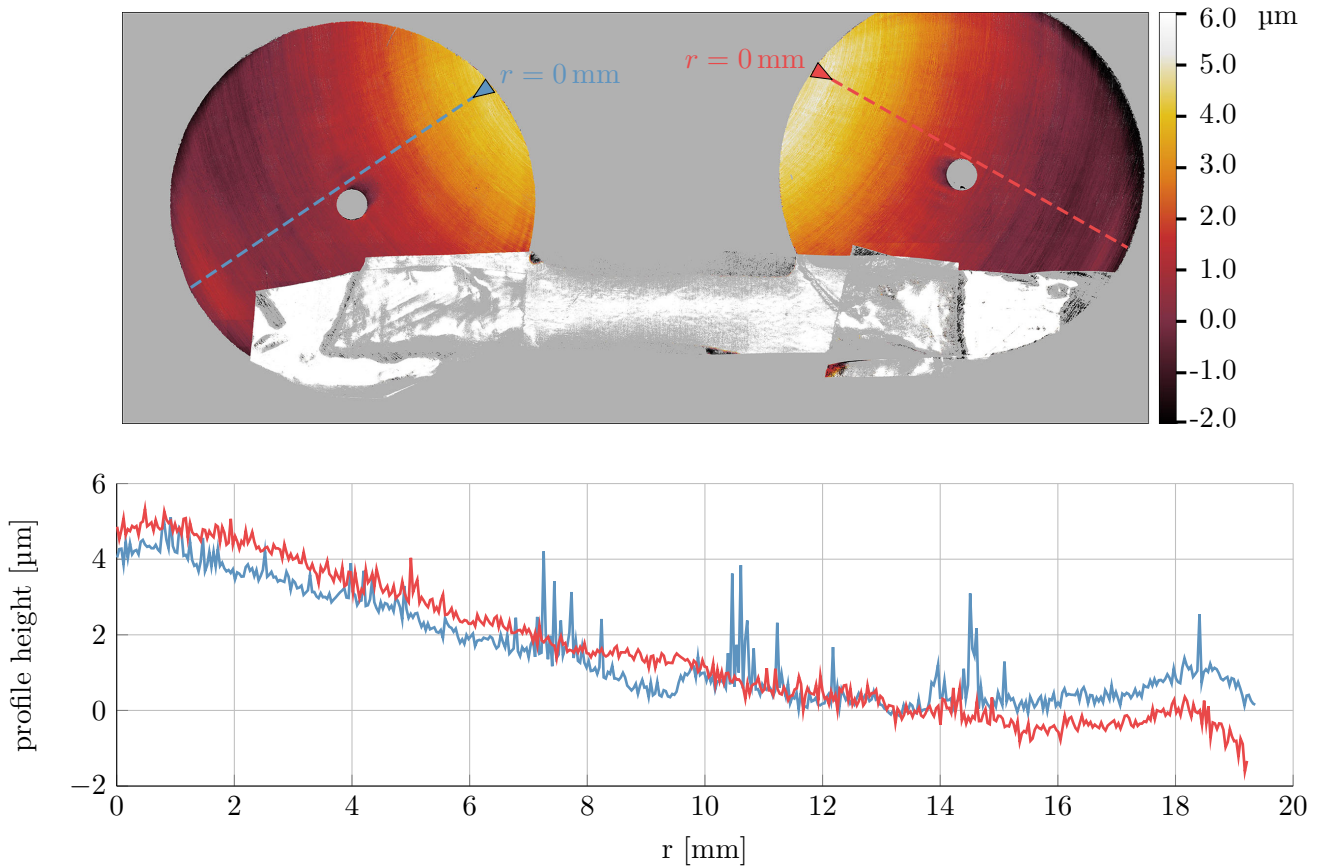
White light measurement of two bearings. A piece of aluminium foil is spanned between the bearings to allow stitching as can be seen in the bottom of the 2D graph. Surface size is 55 mm by 22 mm.
